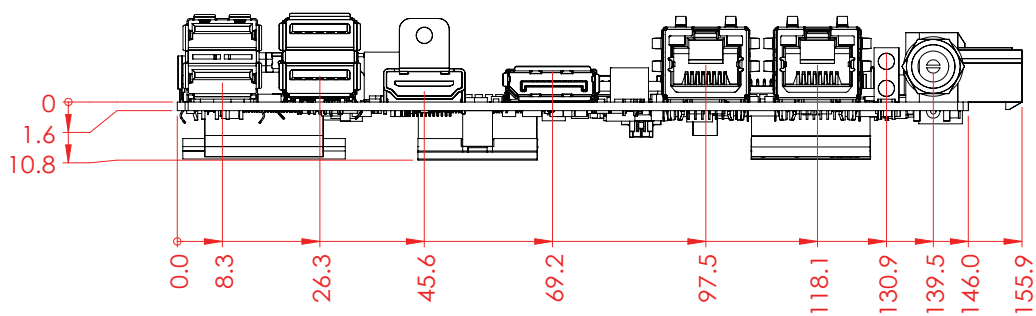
MIO-5154 Mechanical Drawing (Coastline)
